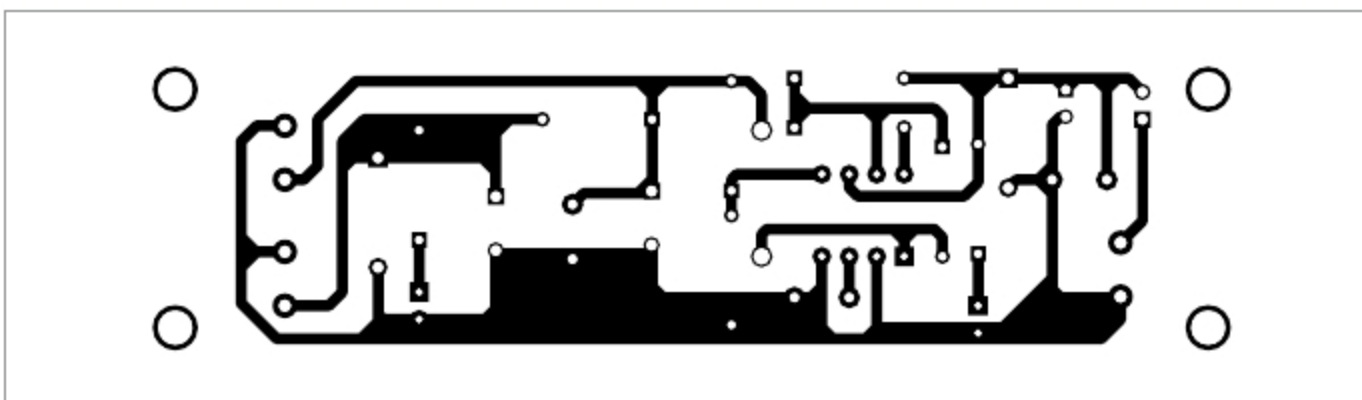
Actual-size PCB layout of DC-to-DC converter
